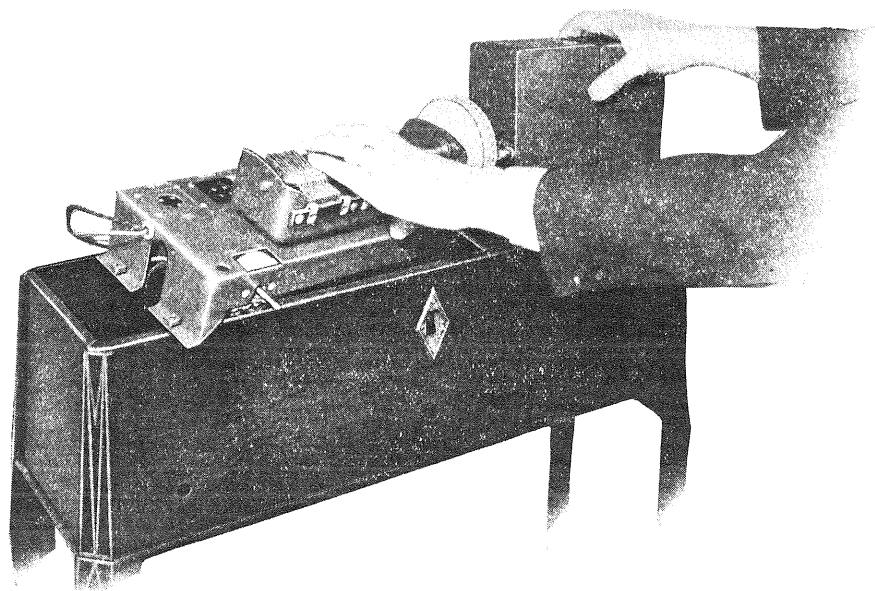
Removing receiver chassis and socket power unit from cabinet in one operation.
